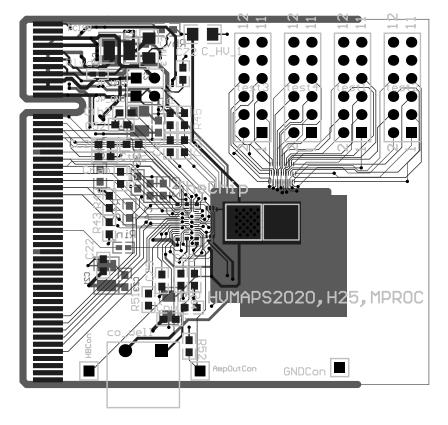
PCB layout for both MPROC and HVMAPS25 chips
